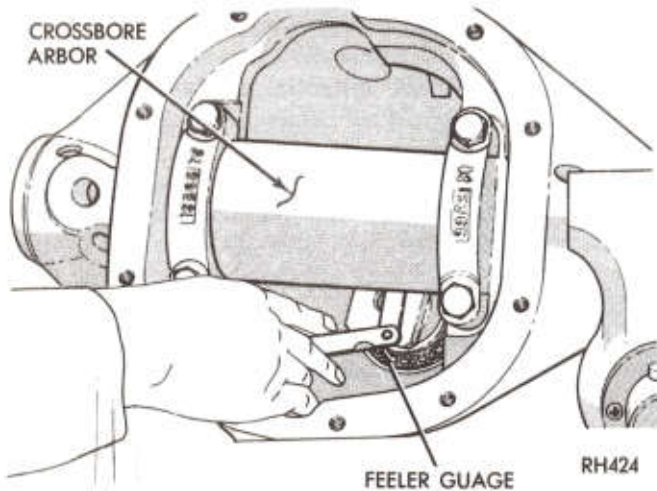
Determining Shim Pack Thickness for Drive Pinion Depth of Mesh
